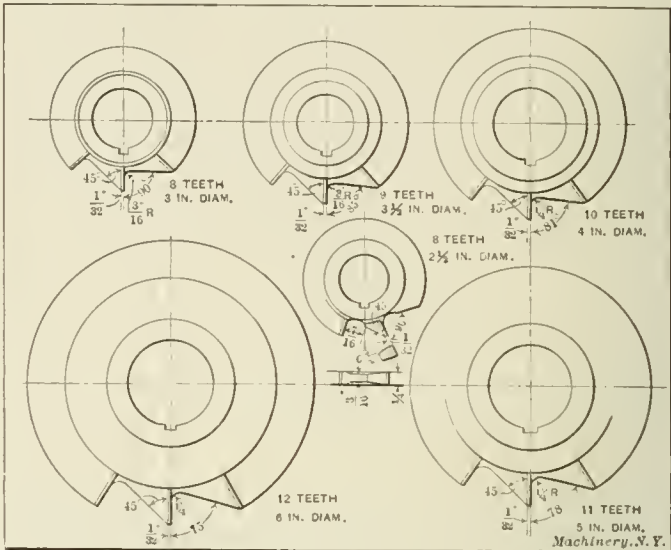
New Type of Side Mill with Detail of Tooth Construction
